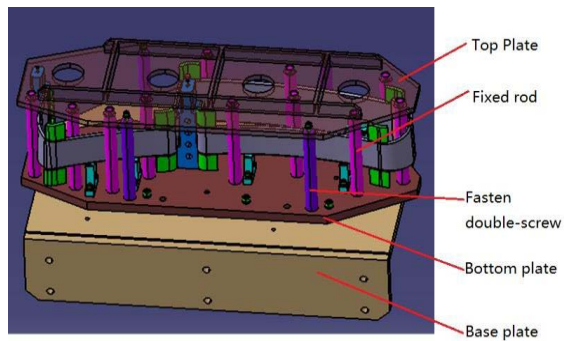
Structure of welding fixture for central conductor mockup welding.
